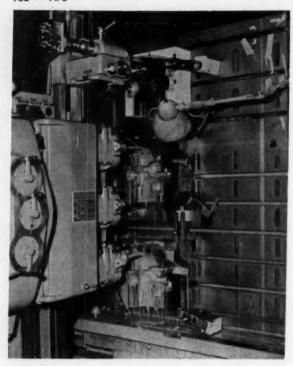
By using a hard plaster core box model two impressions of a shell core box are cut to match.
